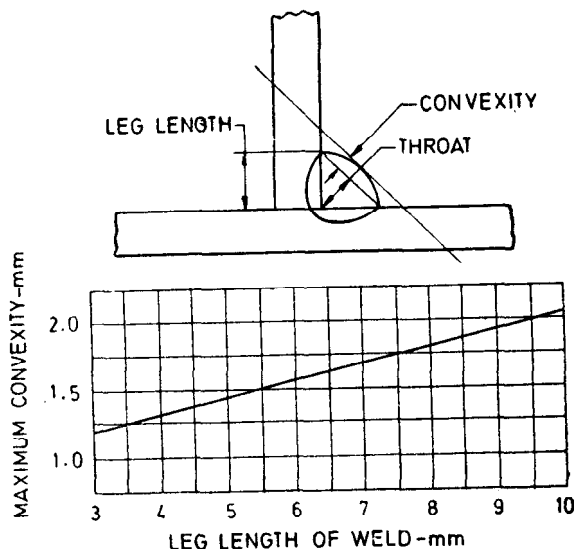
DIMENSIONS OF FILLET WELD
